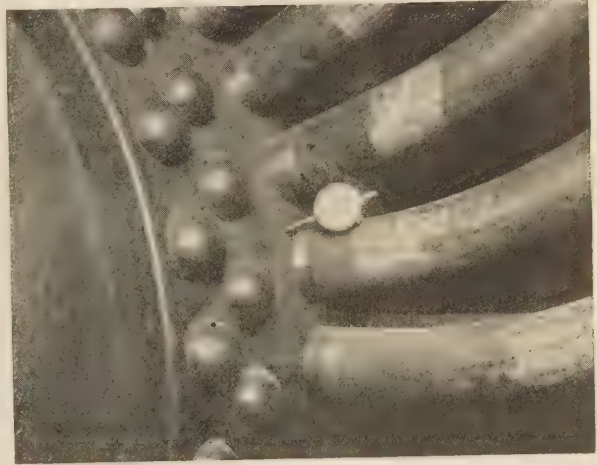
DIAL INDICATOR ATTACHED TO A TUBE
